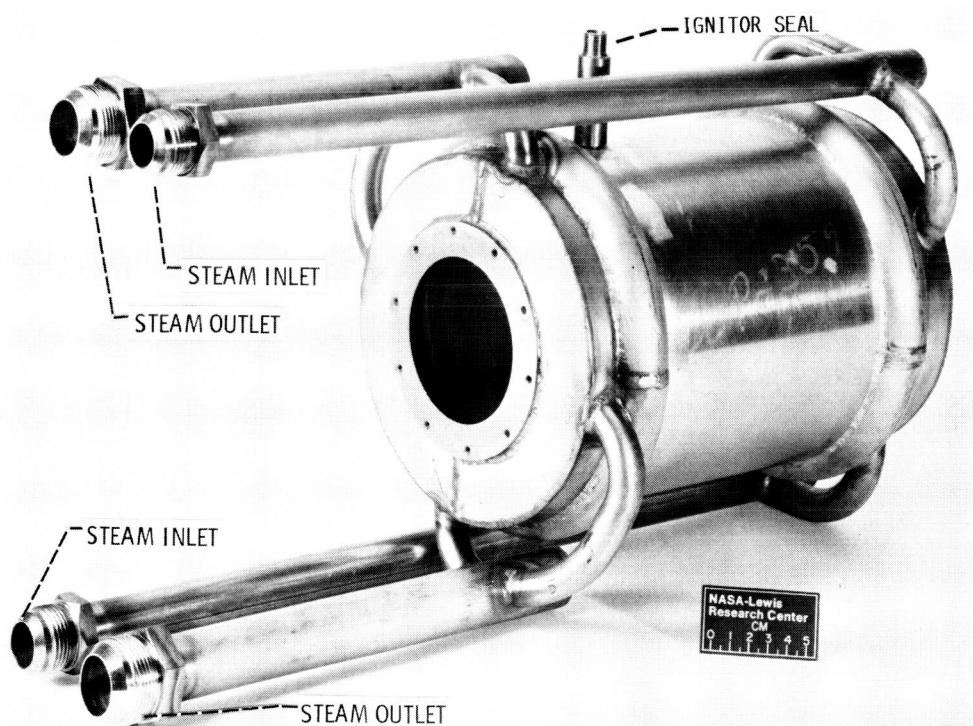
Assembled steam cooled primary zone, variable geometry combustor.
